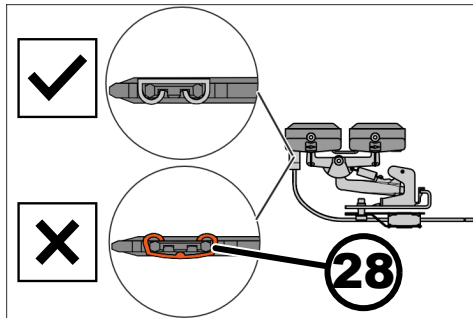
Ensure correct plug-socket connection to sliding contact.
